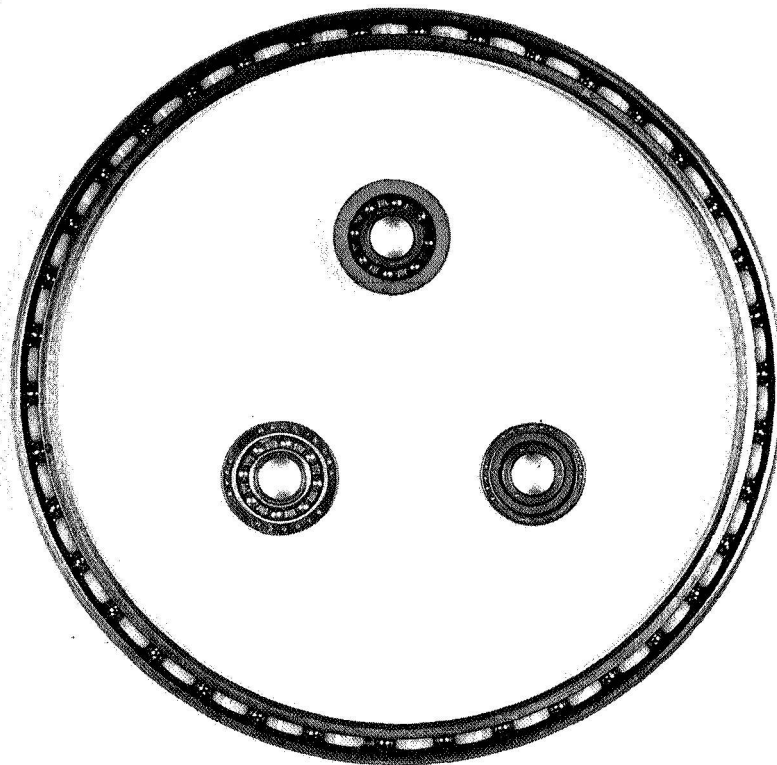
Self-Lubricating Toroidal Ball Separators Used on Alternate Balls in Large Bearing
